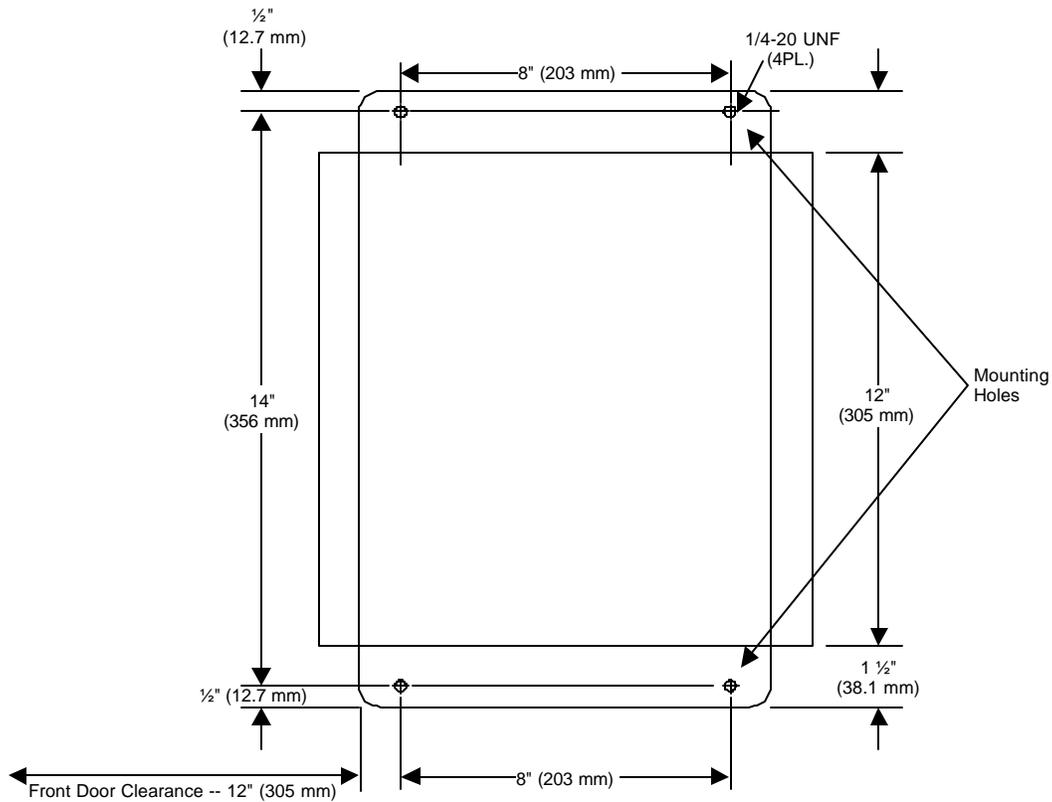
LTC-MAP 2130 Monitor Mounting Dimensions
